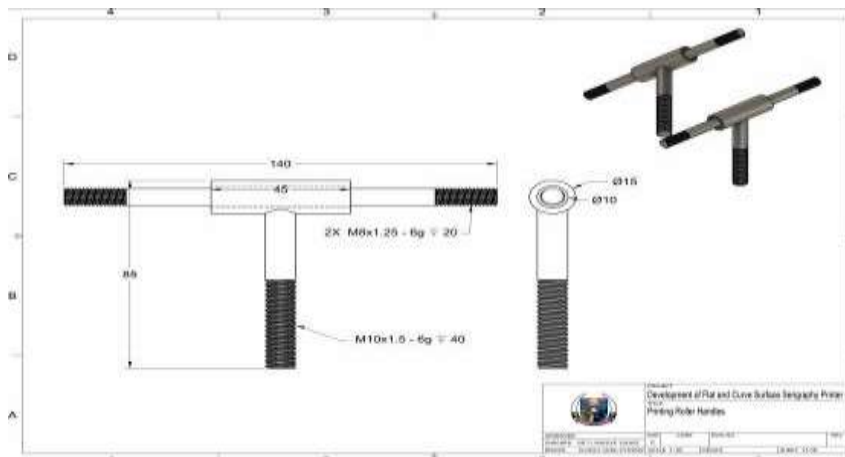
Detailed Drawings of the roller holder for the printer with dimension
